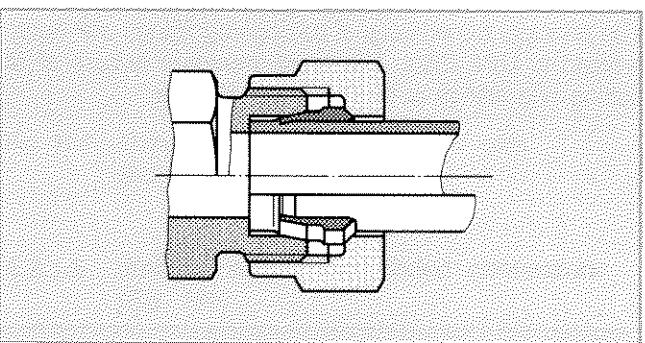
Single cutting ring, metal-to-metal seal, securing function by a single edge
